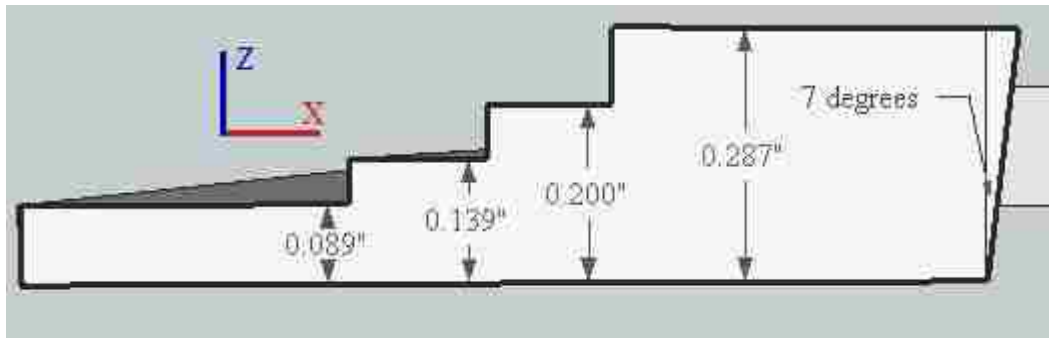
Cross sectional view of the 20x20 cm² middle trimmer lead plate illustrating the thickness values of the plate. The middle trimmer is square, such that all non-hole dimensions are equal in the in-plane and cross-plane dimensions.
